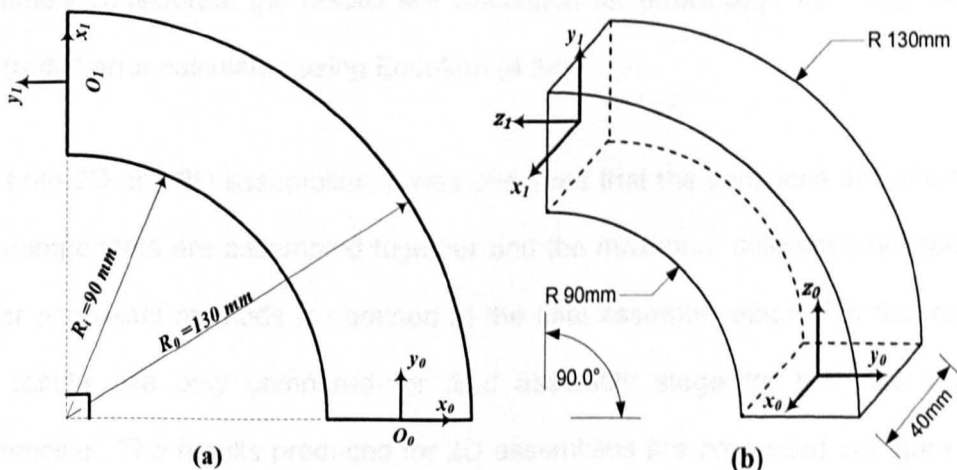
(a) Nominal dimensions uniformly segmented 2D circular component; (b) Nominal dimensions uniformly segmented 3D circular component.
